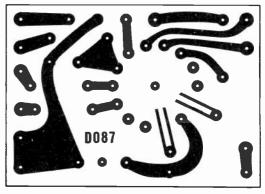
C.r.t. base board print pattern – the component layout will be shown next month. Shown full size.
